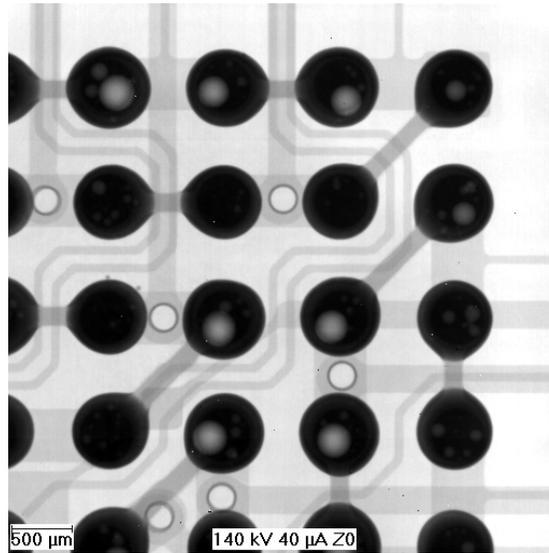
Voids in ENIG board finished SAC305 soldered 144 I/O BGA (courtesy: CALCE)
